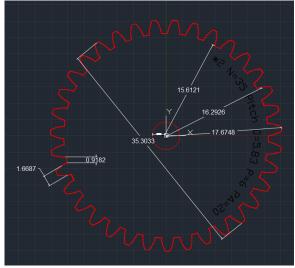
35 Toothed Gear AutoCAD Drawing, Dimensions in mm
